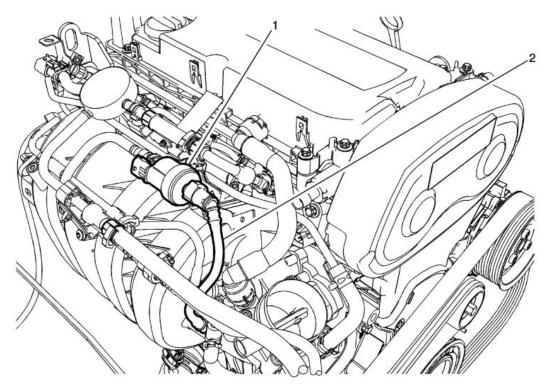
Evaporative Emission Canister Purge Solenoid Valve, Rubber Mounting And Intake Manifold
